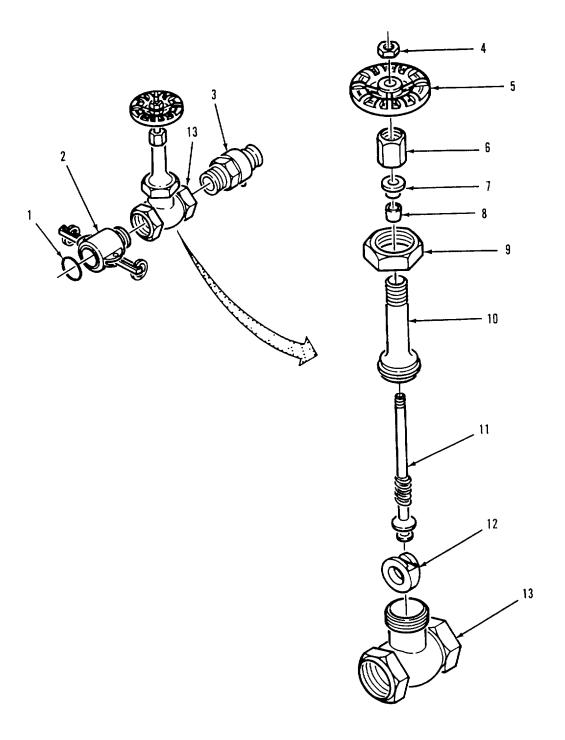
Gate Valve Assembly (2-inch) Repair
